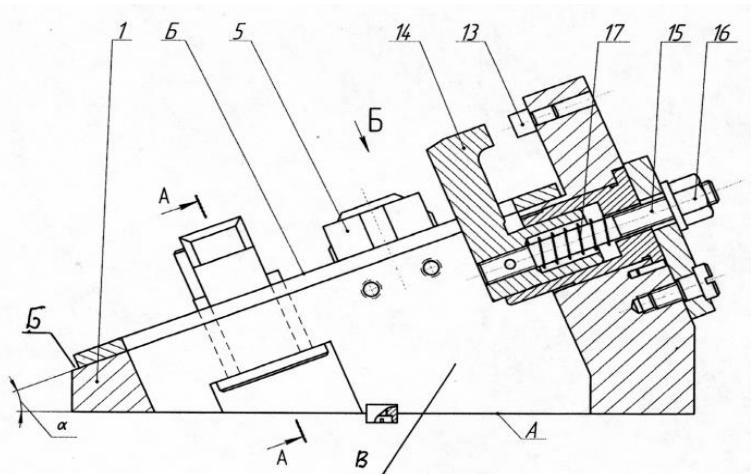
Design of a modern fastening and loosening device for machining of plate-type parts on a milling machine.
